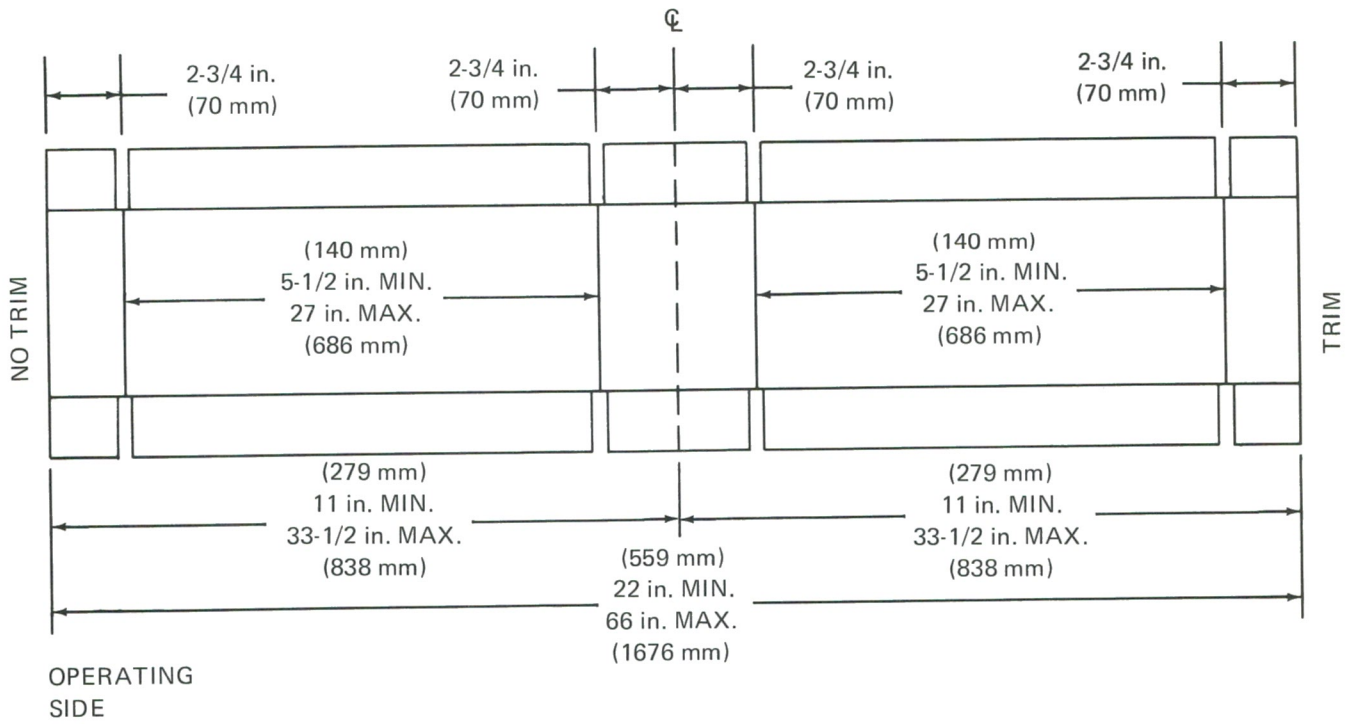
2-3/4 in. (70 mm) END PANEL WITHOUT TRIM
